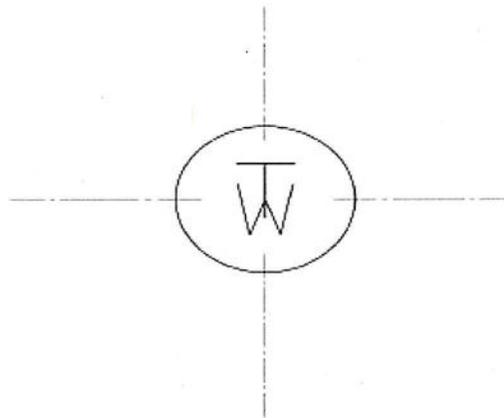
IDENTIFICATION OF A TRU WELD STEEL HEADED STUD ANCHOR
